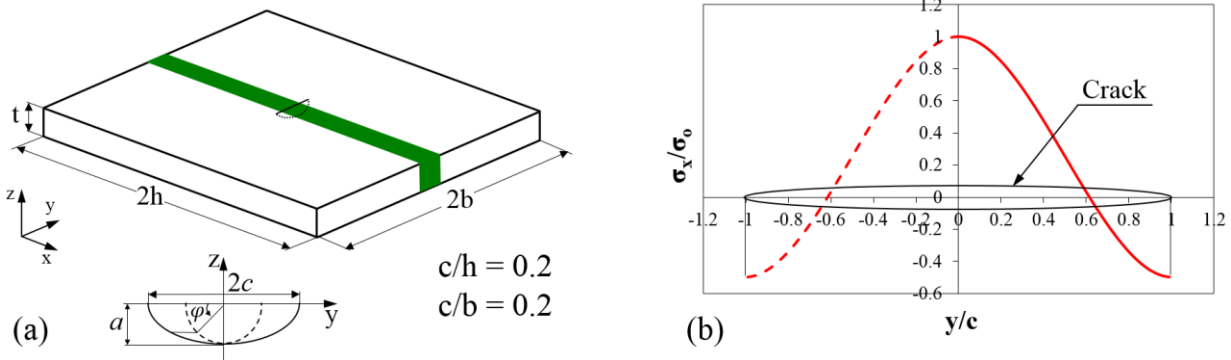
Details of the butt-welded joint. (a) geometry of the surface cracked butt-welded joint, and (b) distribution of the calculated welding RS.
